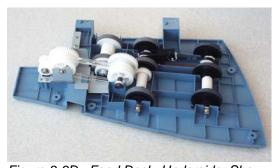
D Feed Deck, Underside, Showing Drive Components
